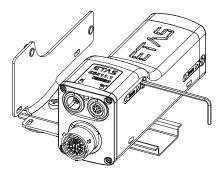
Fastening to an ES4xx Angle Bracket (left) using the Integrated Assembly Elements
